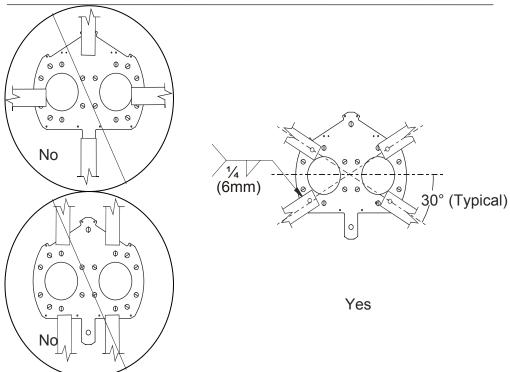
TELETOM® Tandem Mounting Plate and Support Attachments
